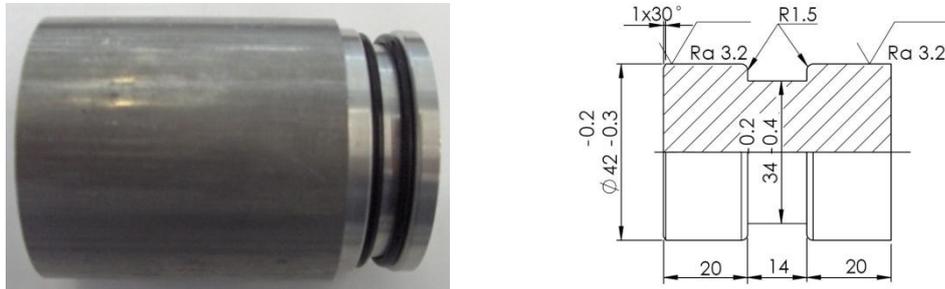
Mandrel with two O-rings in the corners of the groove (left) and drawing of a mandrel that will be used with adhesives (right)
